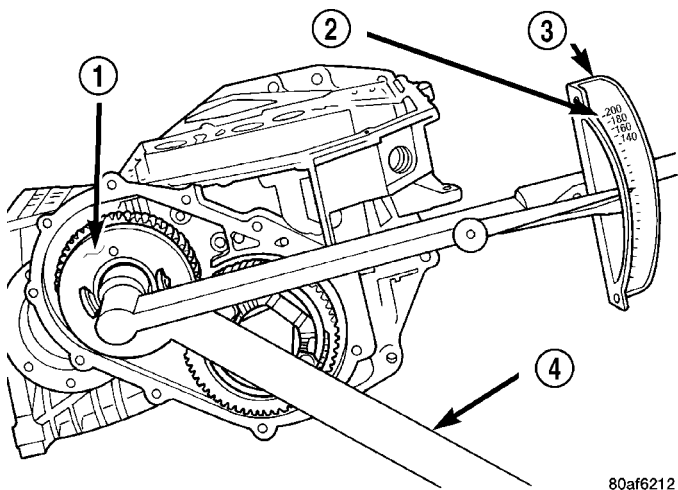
Tighten Transfer Gear Nut to 271 N·m (200 ft. lbs.)
